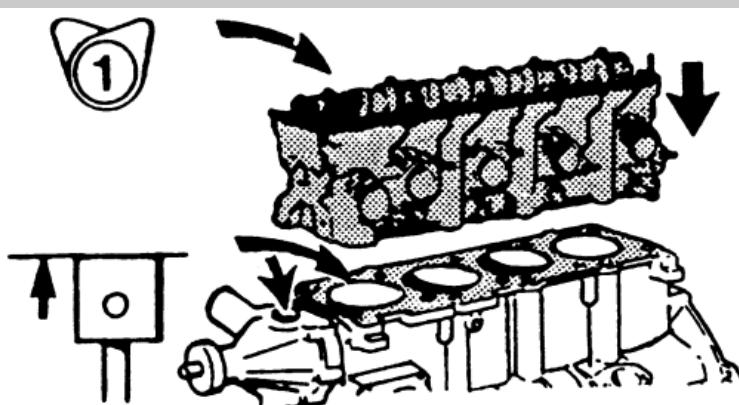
Positioning the cylinder head and gasket on the engine block. Check that the water pump O-ring sits correctly in the groove
